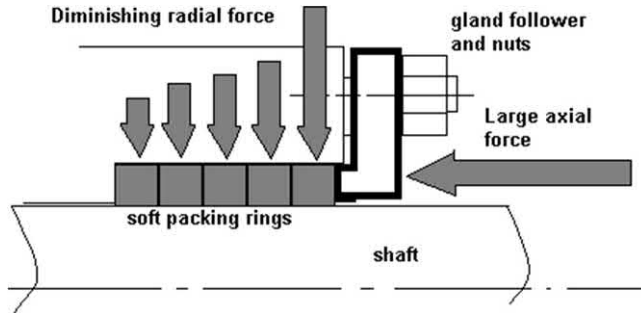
Basic elements of a soft-packed shaft seal [gland packing].
